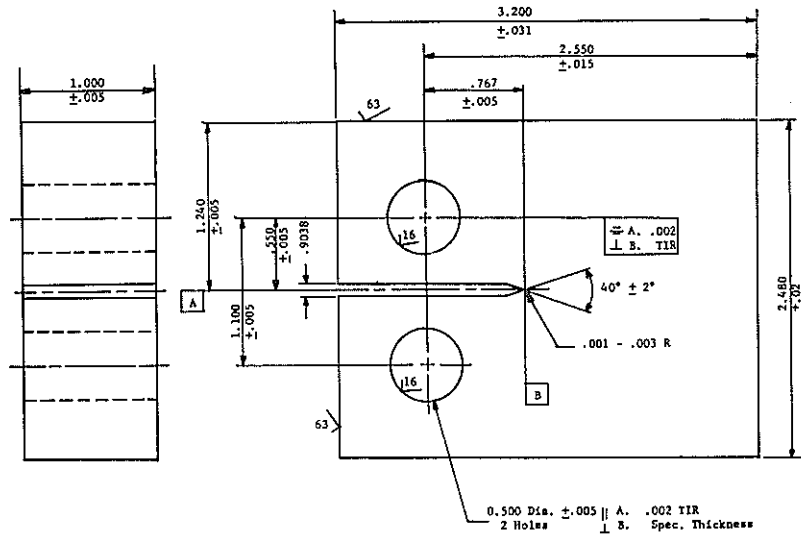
IT - WOL fatigue crack propagation test specimen from reference [8]. Dimensions in in. (25.4 mm = 1 in.).
